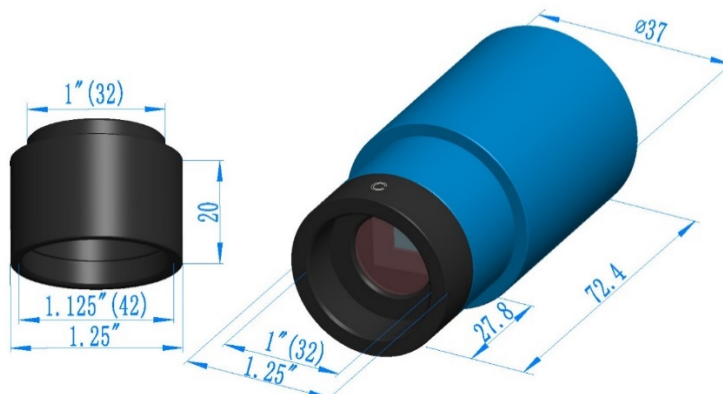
Dimension and Mount of G3M662C and 1.25" extender
